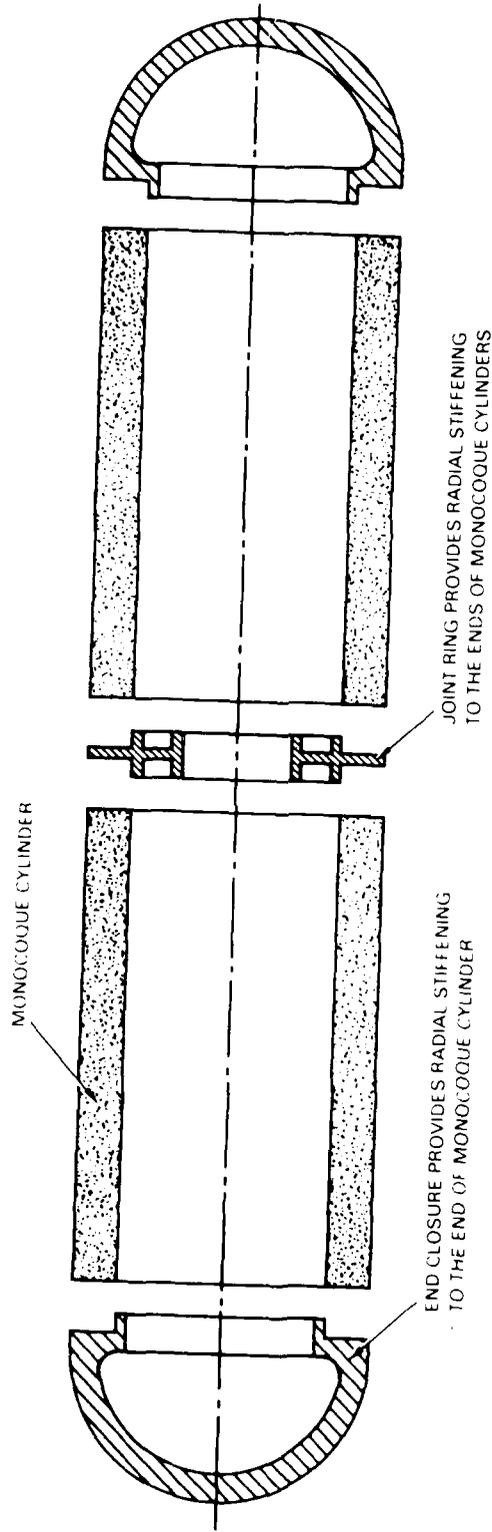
The length of a cylindrical pressure housing assembly consisting of a single monocoque cylinder supported radially at the ends by metallic end closures can be extended without decrease in critical pressure by adding more cylinders that are joined and radially supported at their ends by metallic joint rings.
